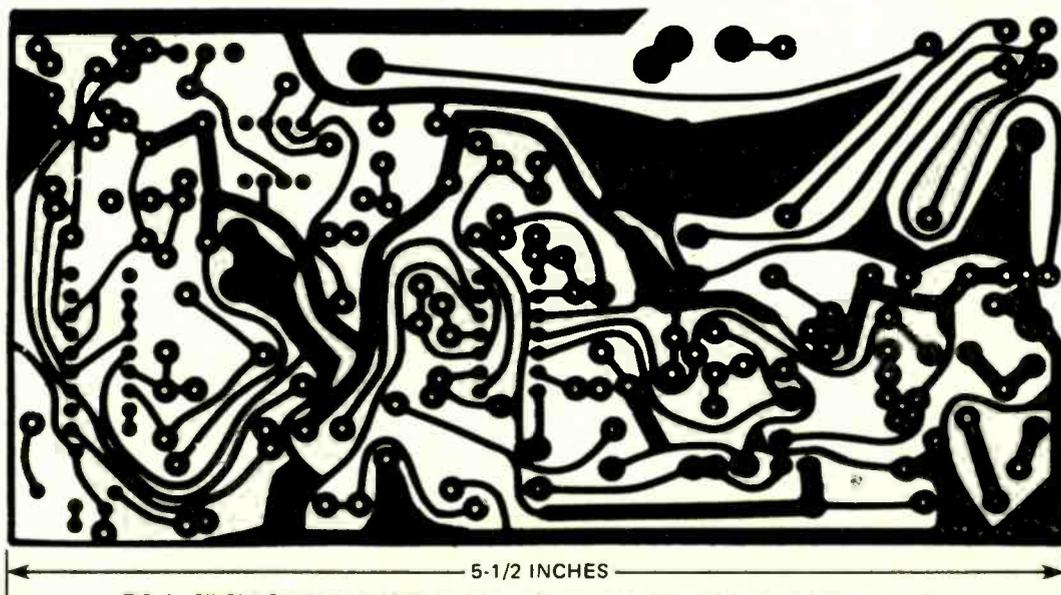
SINGLE SIDED PC BOARD contains sync corrector, RF modulator, and power supply.
